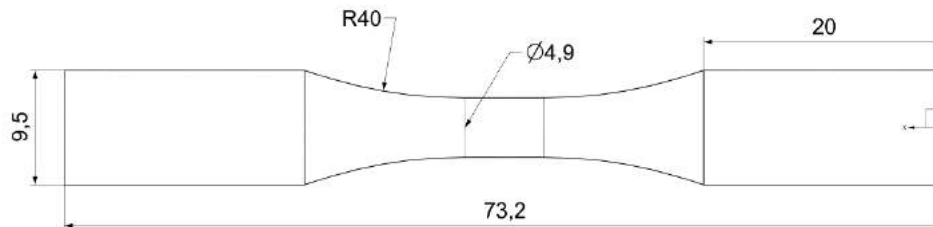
Dog-bone shaped specimen with dimensions (mm)
